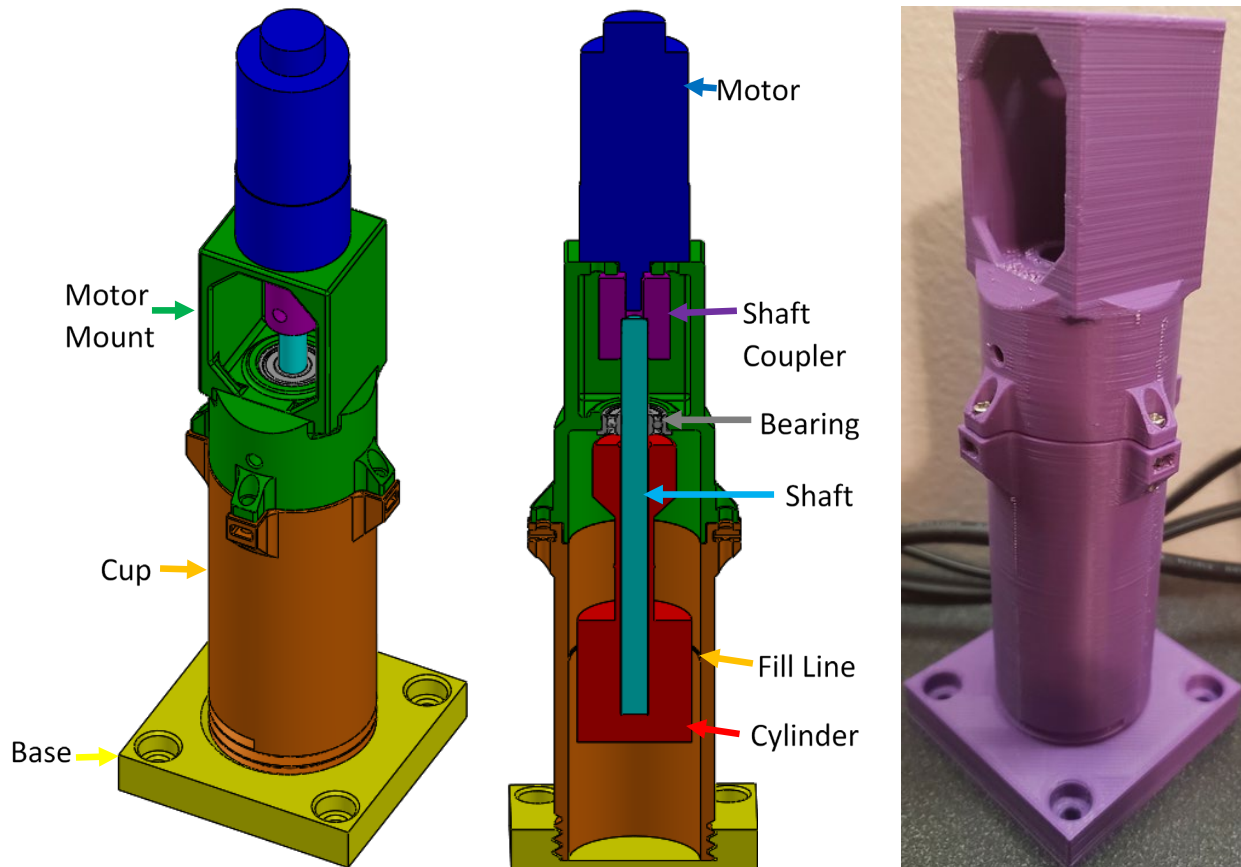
CAD of the completed version 1 test assembly and a 3D printed prototype. In the CAD, the motor mount is green, the cylinder is red, the base is yellow, the cup is orange, the bearing is grey, the shaft coupler is purple, the shaft is aqua, and the motor is blue. The assembly is approximately 8.2” tall with the motor and 5.9” tall without the motor. The base is a 2.2” square.
